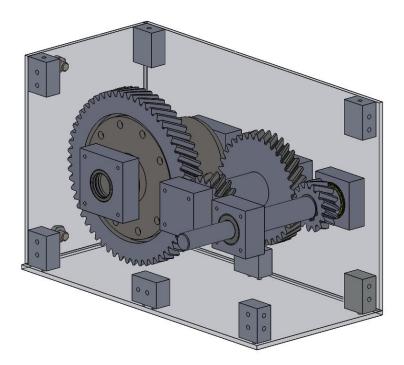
Shows the drivetrain encased in the rectangular housing without the front or top plate. This will be how the shafts and gears are inserted into the housing before bolting the remaining faces on.
